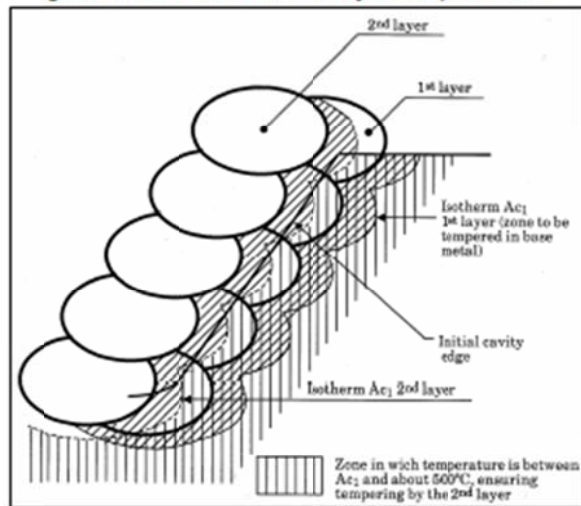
Repairs by welding exempted of subsequent heat treatment.
